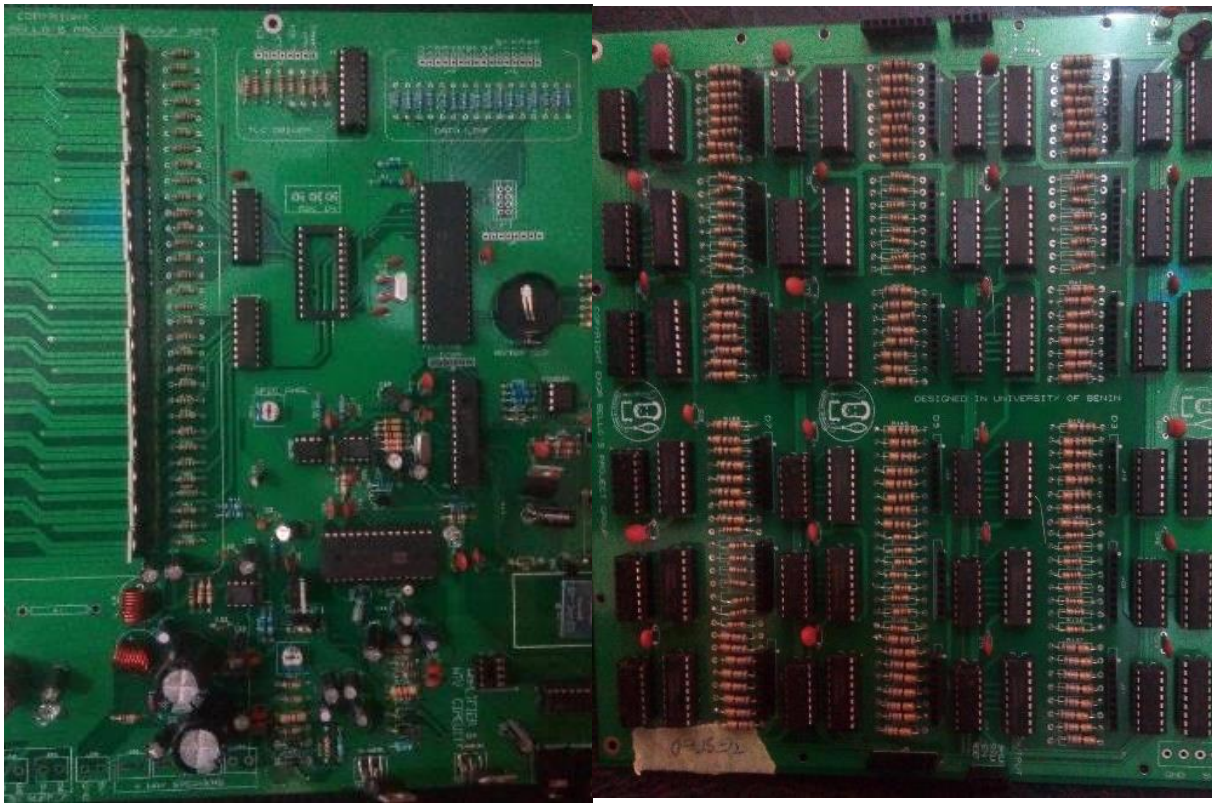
(a) Completely soldered LC Controller Board (b) One of the four completely soldered Cathode Driver Board
